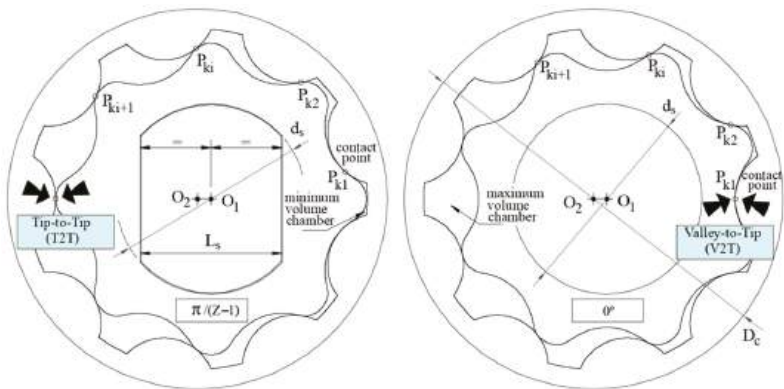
The benchmark gerotor in working function: the Tip-to-Tip (T2T) position (left) and the Valley-to-Tip (V2T) position (right), the shaft keyway (‘yes’ shaft keyway, left) and the shaft hole without keyway (‘no’ shaft keyway, right).
